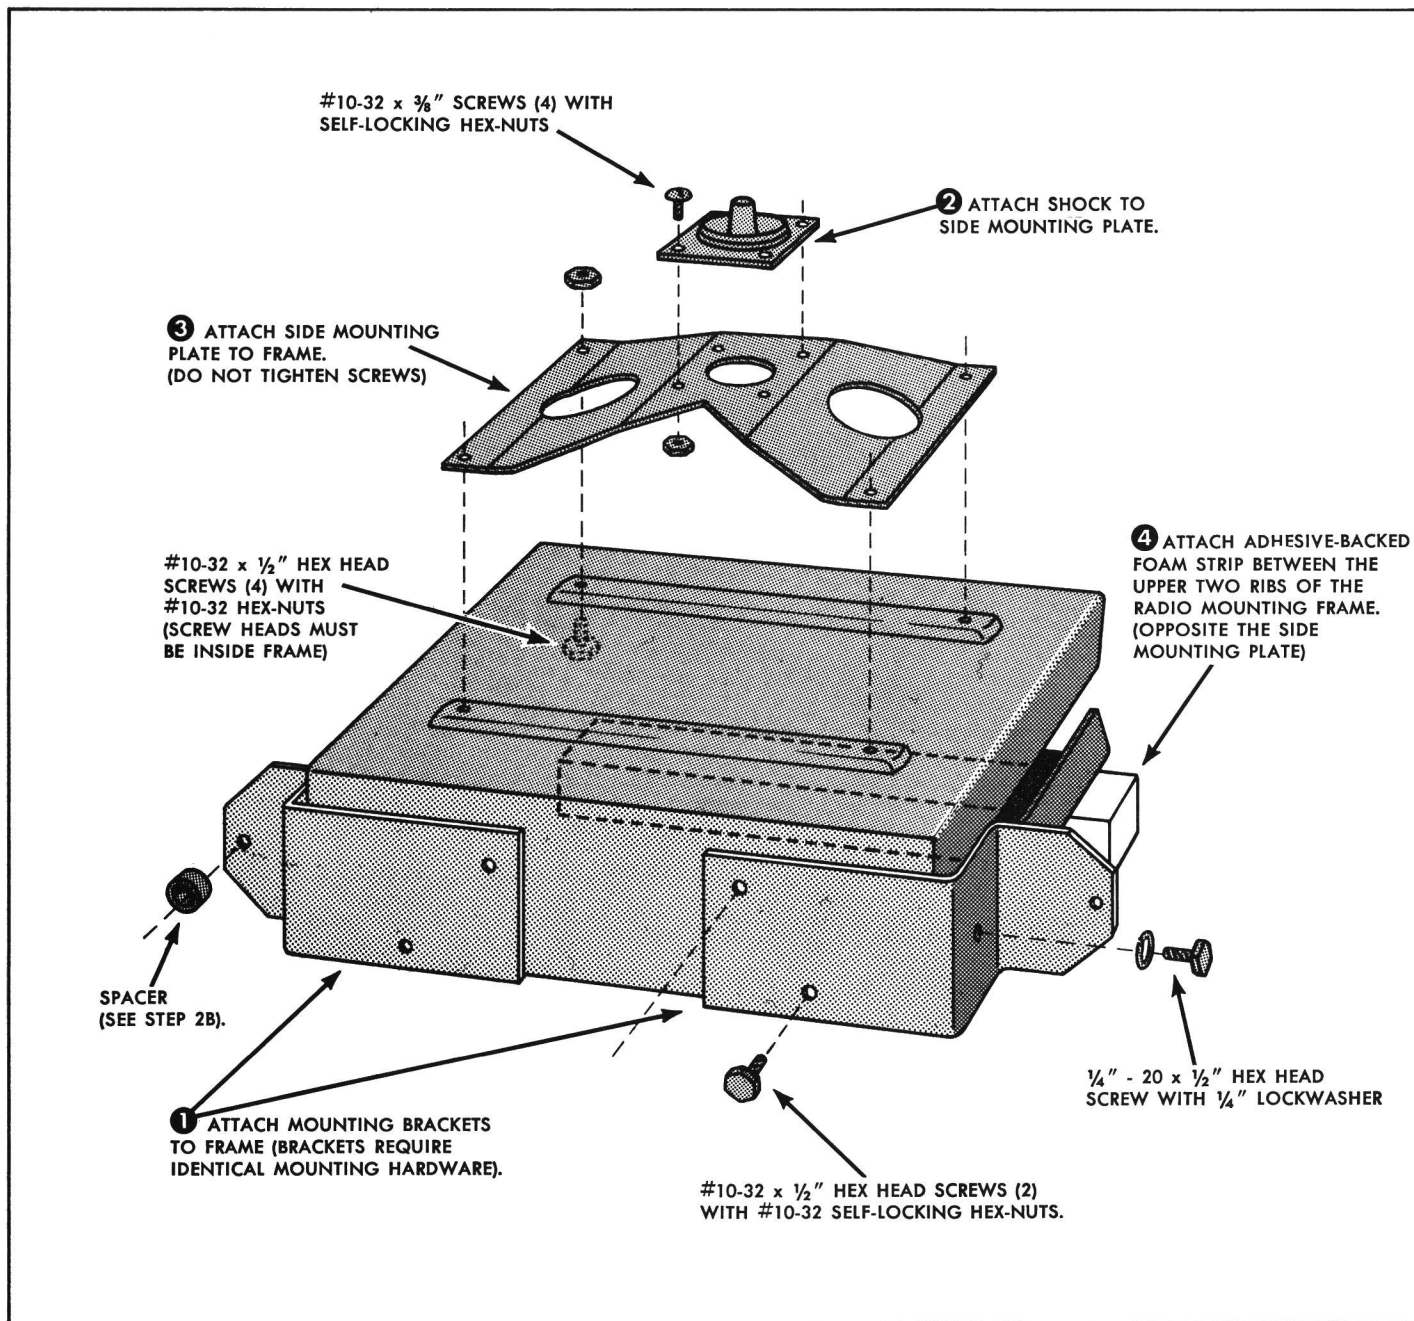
RADIO MOUNTING FRAME ASSEMBLY
